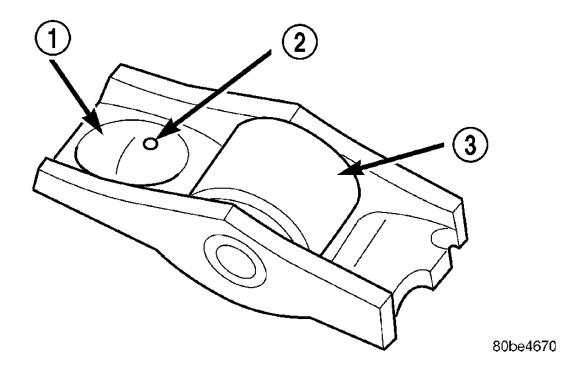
View Of Rocker Arm Components Courtesy of CHRYSLER LLC
